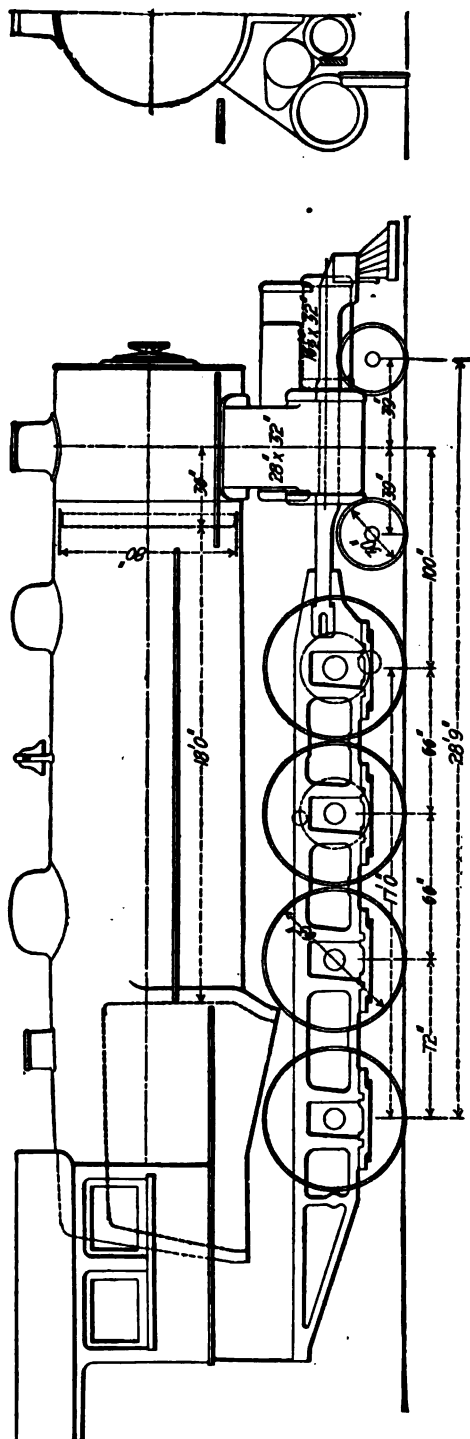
Design of Twelve-wheel Type, Balanced Compound.
